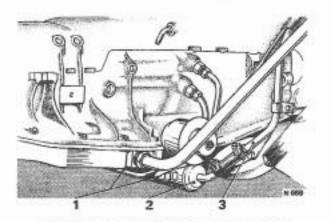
HEAT EXCHANGER FLUID PIPES (EARLY CARS)
